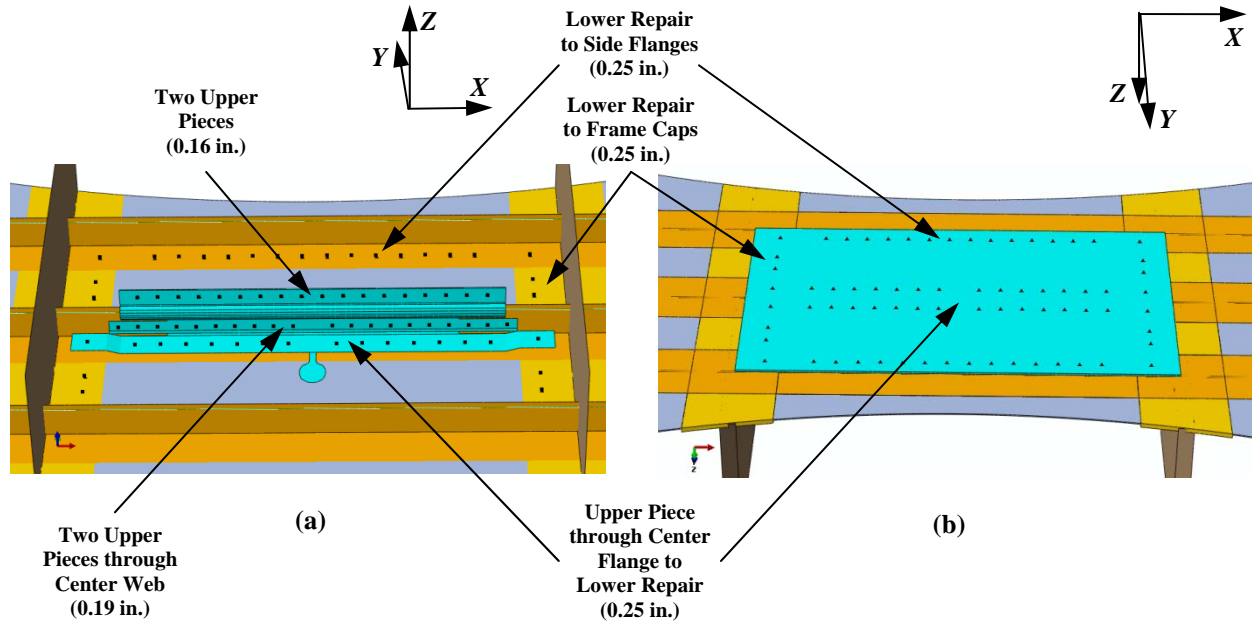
Location of fasteners viewed from (a) substructure side, (b) smooth side. Dimensions represent fastener diameter.
